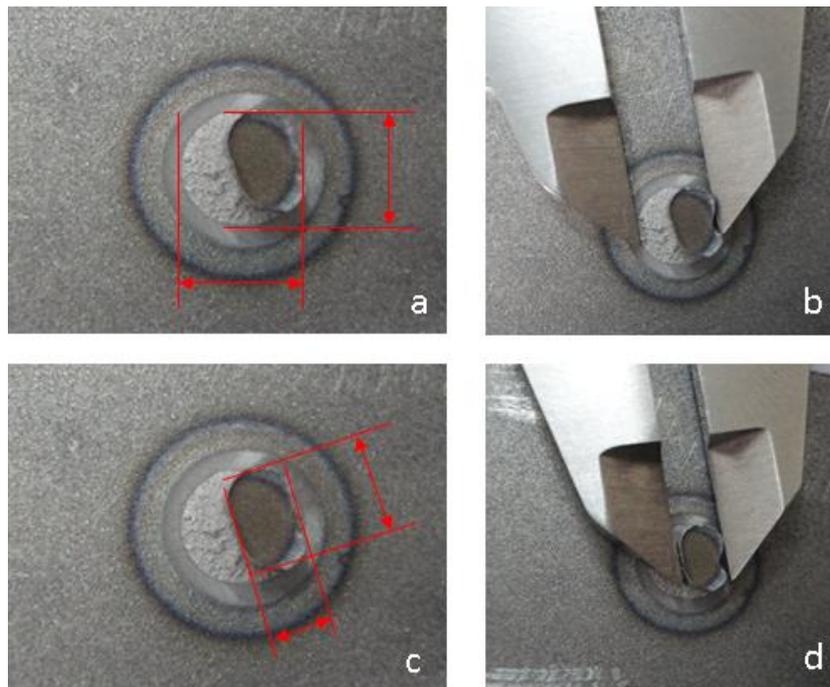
Measuring a partial plug weld failure. a. Measuring the original weld area of a partial plug, b: correct positioning of the Vernier calliper on the rough fracture surface to give the original weld diameter, c: measuring the plug area of a partial plug, d: positioning the Vernier calliper on the plug. Source: TWI
